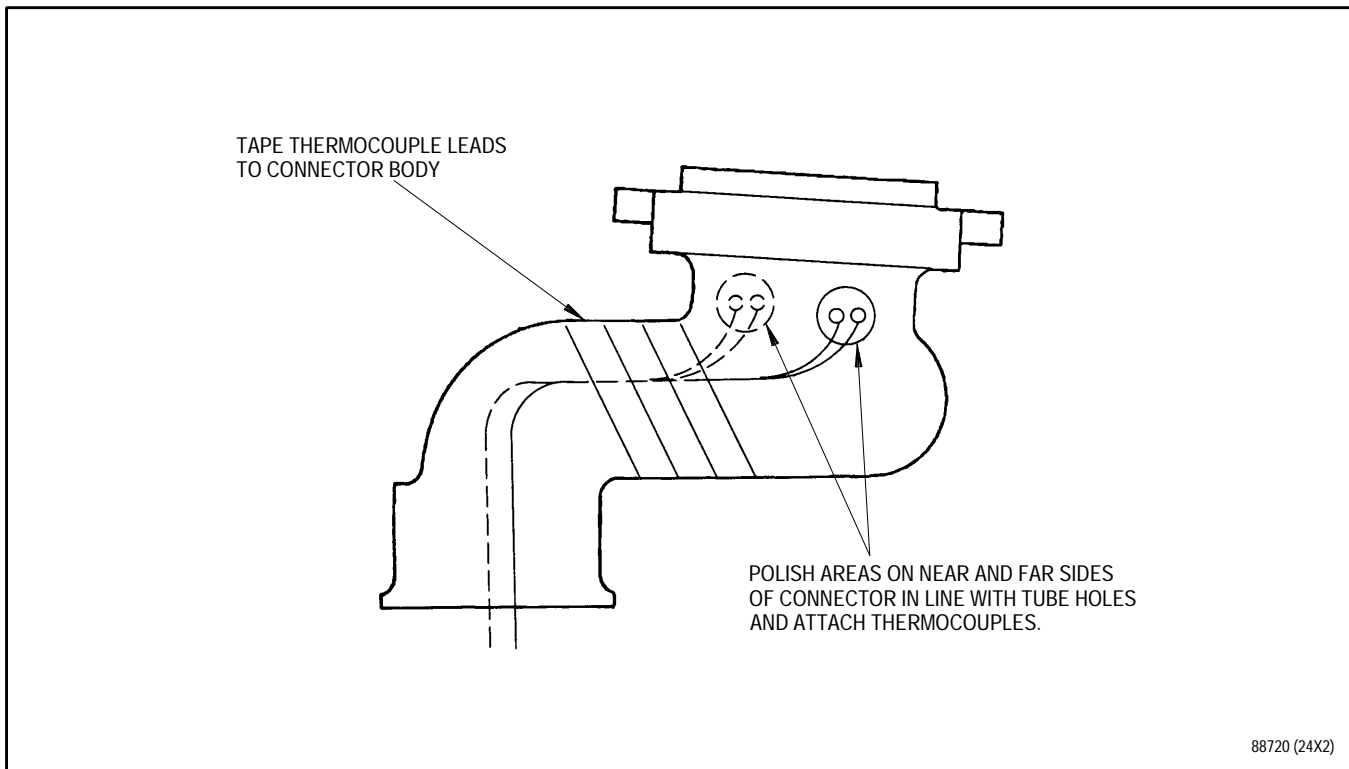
No. 4 Bearing Connector - Preparation for Brazing
